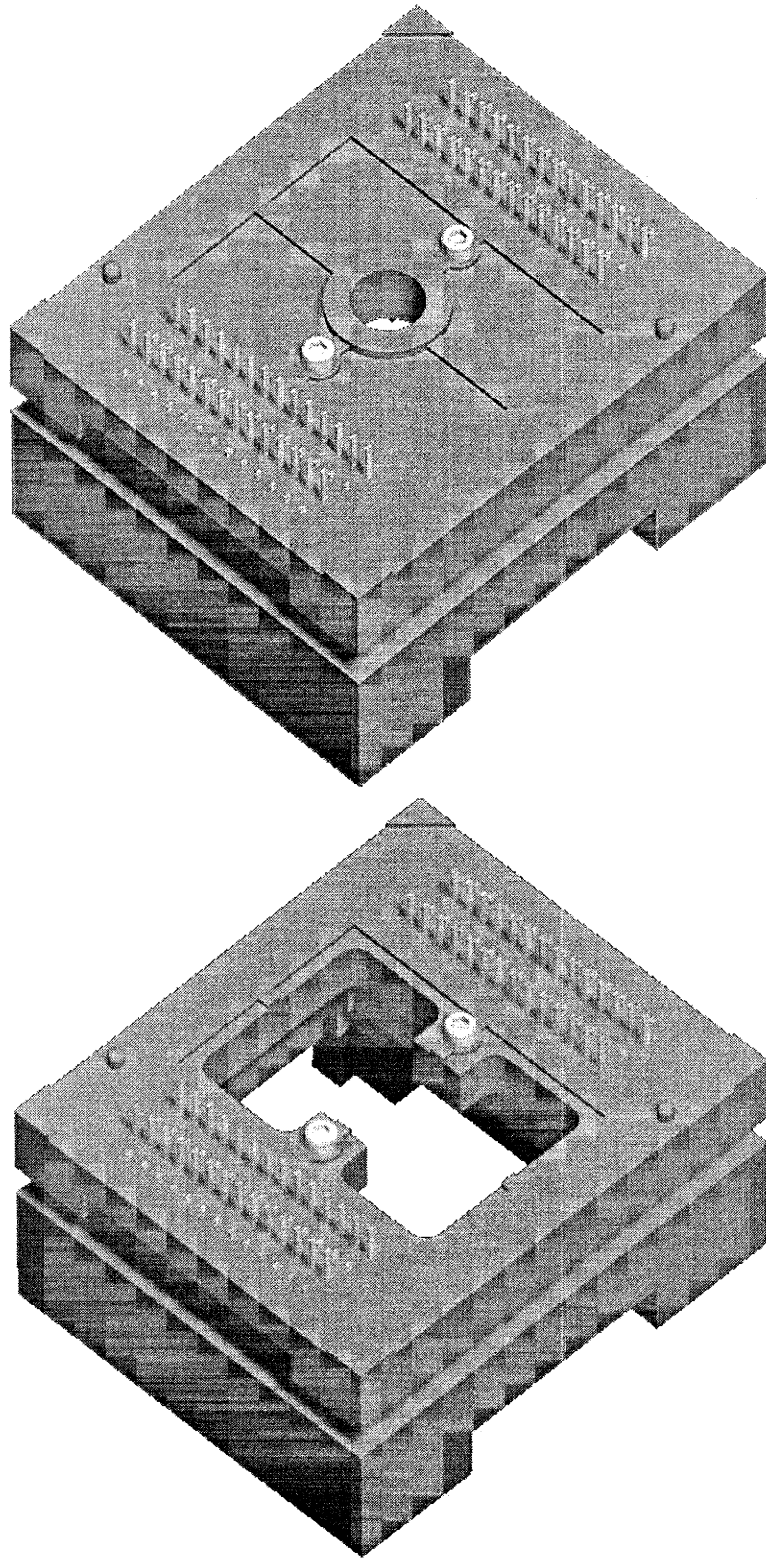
Rendered views of the DieMate™ socket showing the unaltered socket (top) and the altered socket (bottom). Note that the unnecessary pins have been removed in both views.
